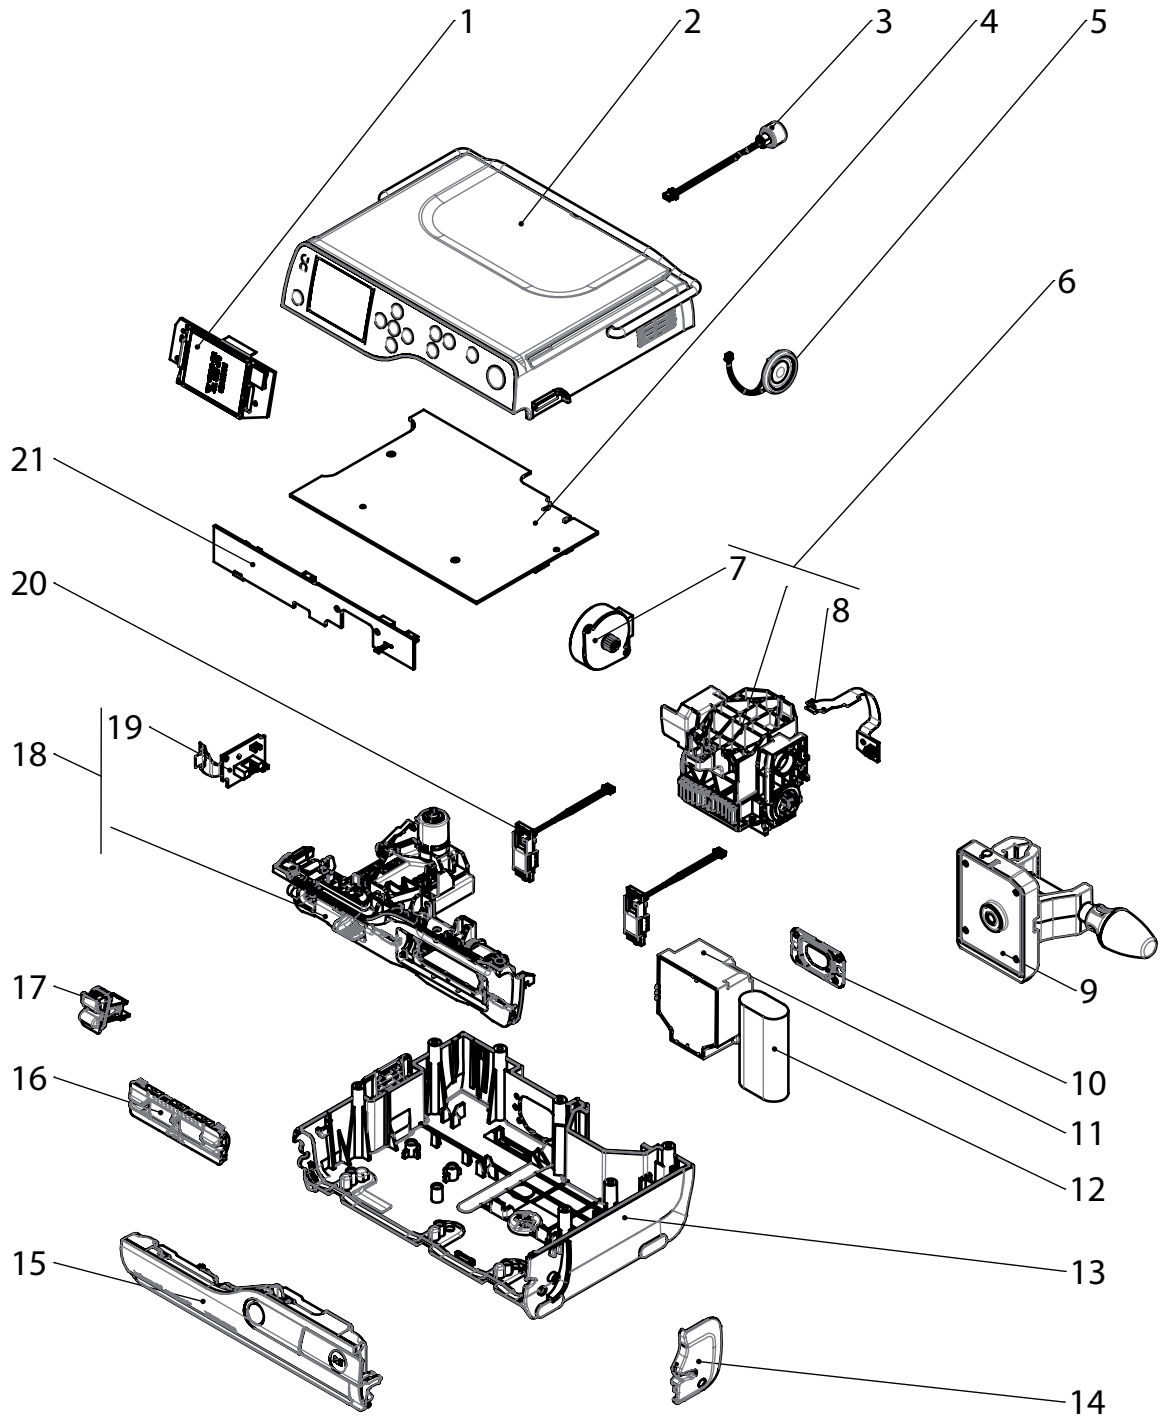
1 Exploded drawing Infusomat® compact<sup>plus</sup> P
